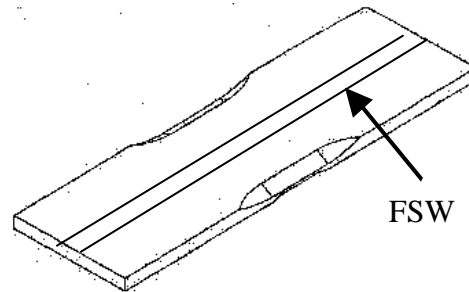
Trapezoid fatigue sample manufactured from FSW plate specimens.
